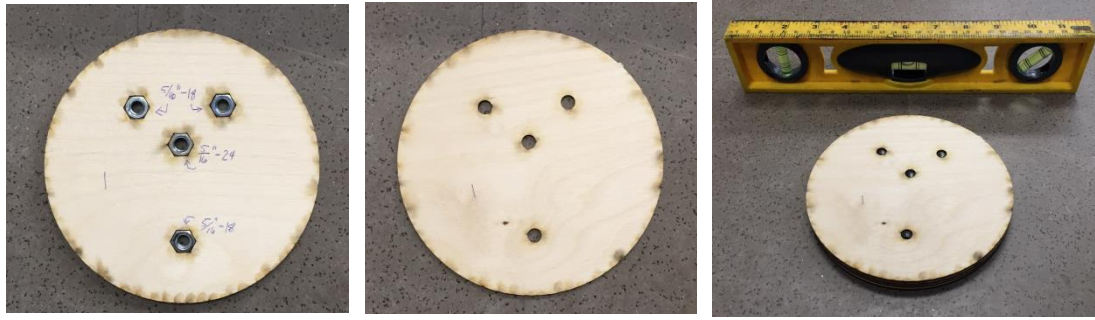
Fin Can Bulkhead (from left. to right): Layer with hex nuts inserted, layer with laser cut holes for rods, completed bulkhead
